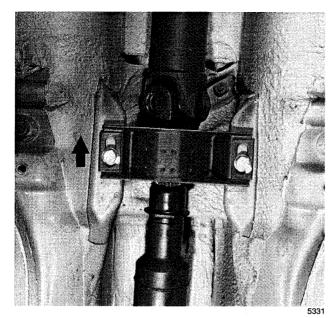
Preload center bearing toward front 4-6 mm (arrow).
